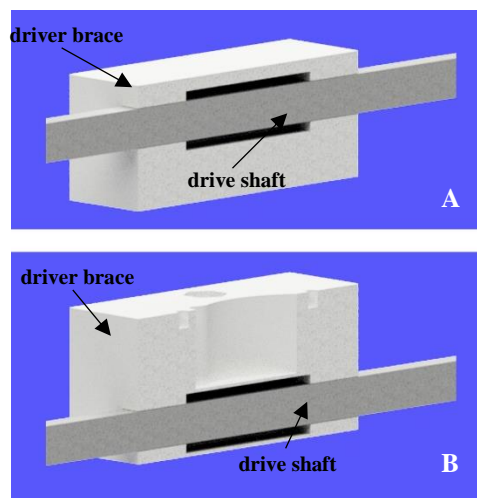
(A)Section view: Driver brace with Drive shaft of the upper X-stage (B)Section view: Driver brace with Drive shaft of the lower X-stage
